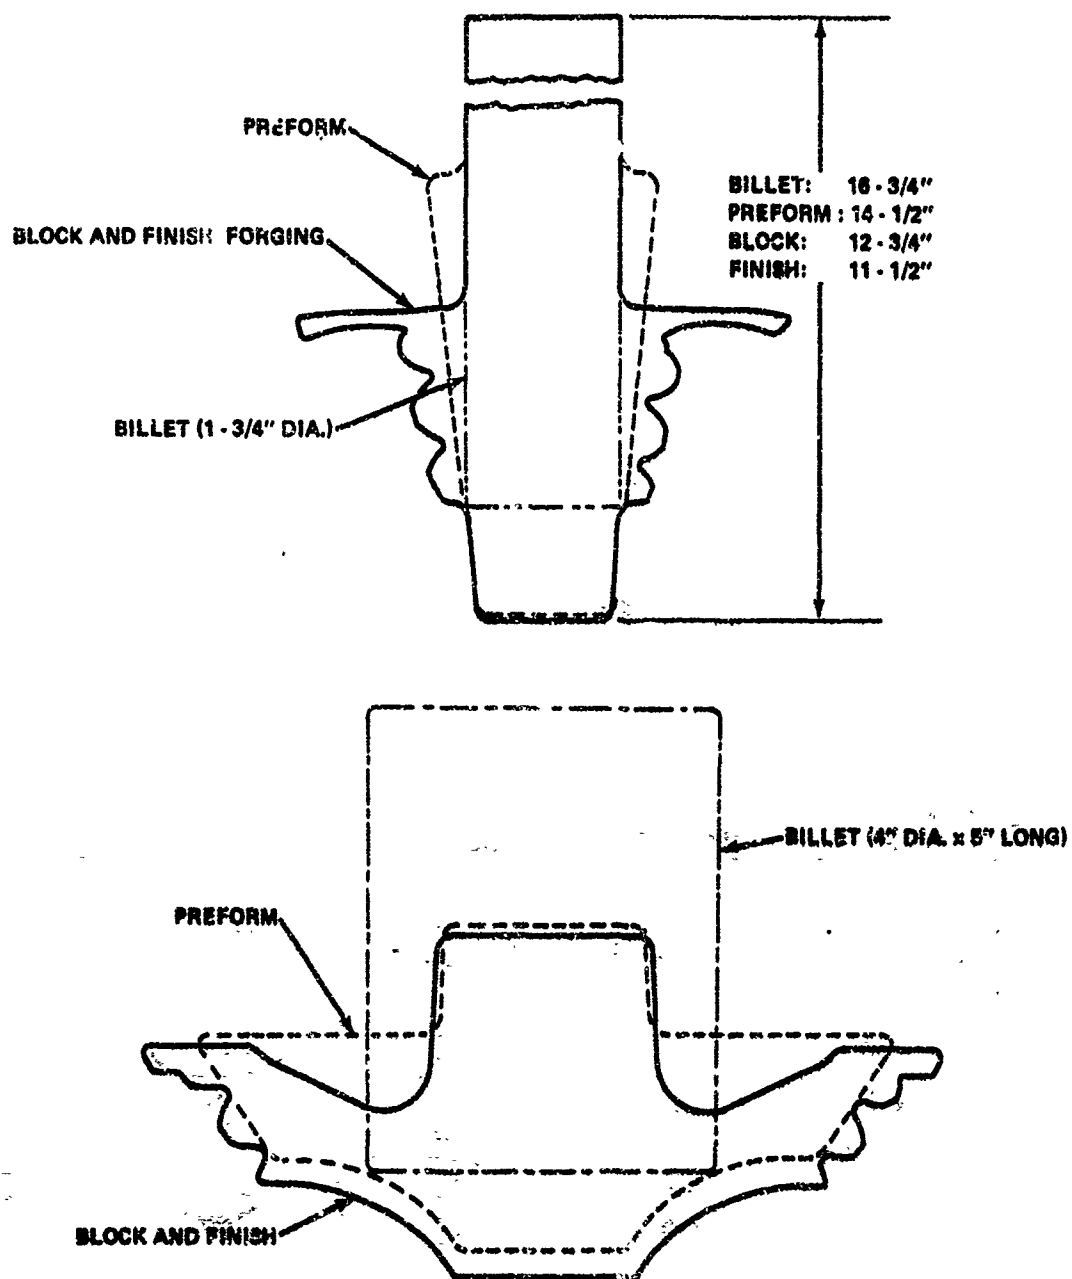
Cross-sectional Representations of the Spiral Bevel Gear and Pinion from Billet to Finish Forging
